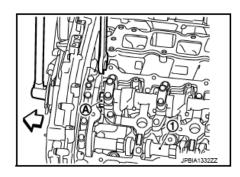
Identifying Matching Marks On Top Of Sprocket Teeth Courtesy of NISSAN MOTOR CO., U.S.A.
